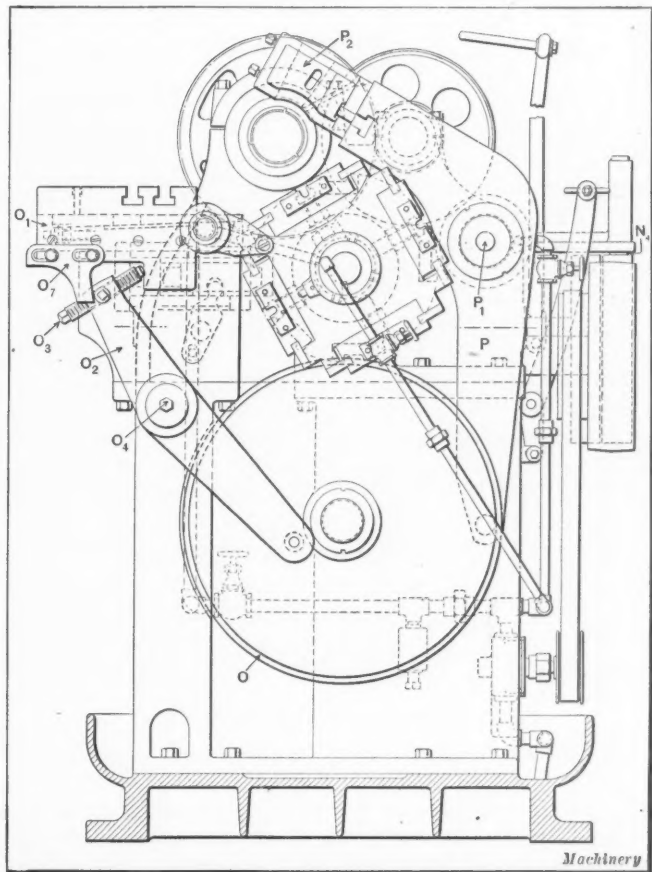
Diagram illustrating Method of operating Forming Slide and Cutting-off Arm, also showing Construction of Turret and Turret Slide
